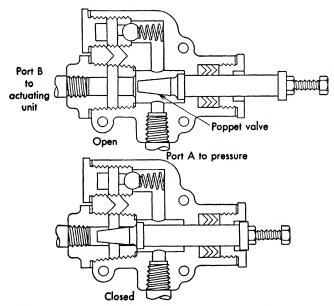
A schematic drawing of a pressure cutoff valve or a "Travel Limit" or "Stop" valve.
